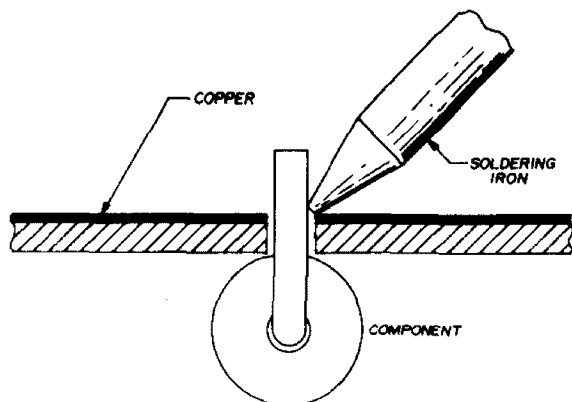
When soldering components to a printed-circuit board place the tip of the soldering iron between the component lead and the copper foil.
